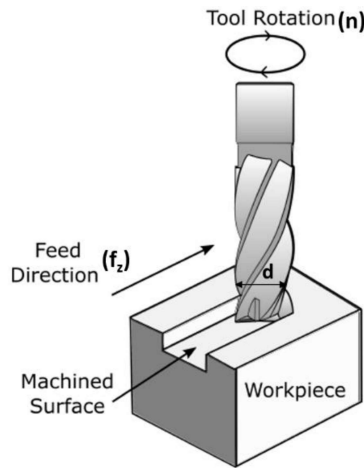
Diagram of a milling tool cutting a workpiece [13]
